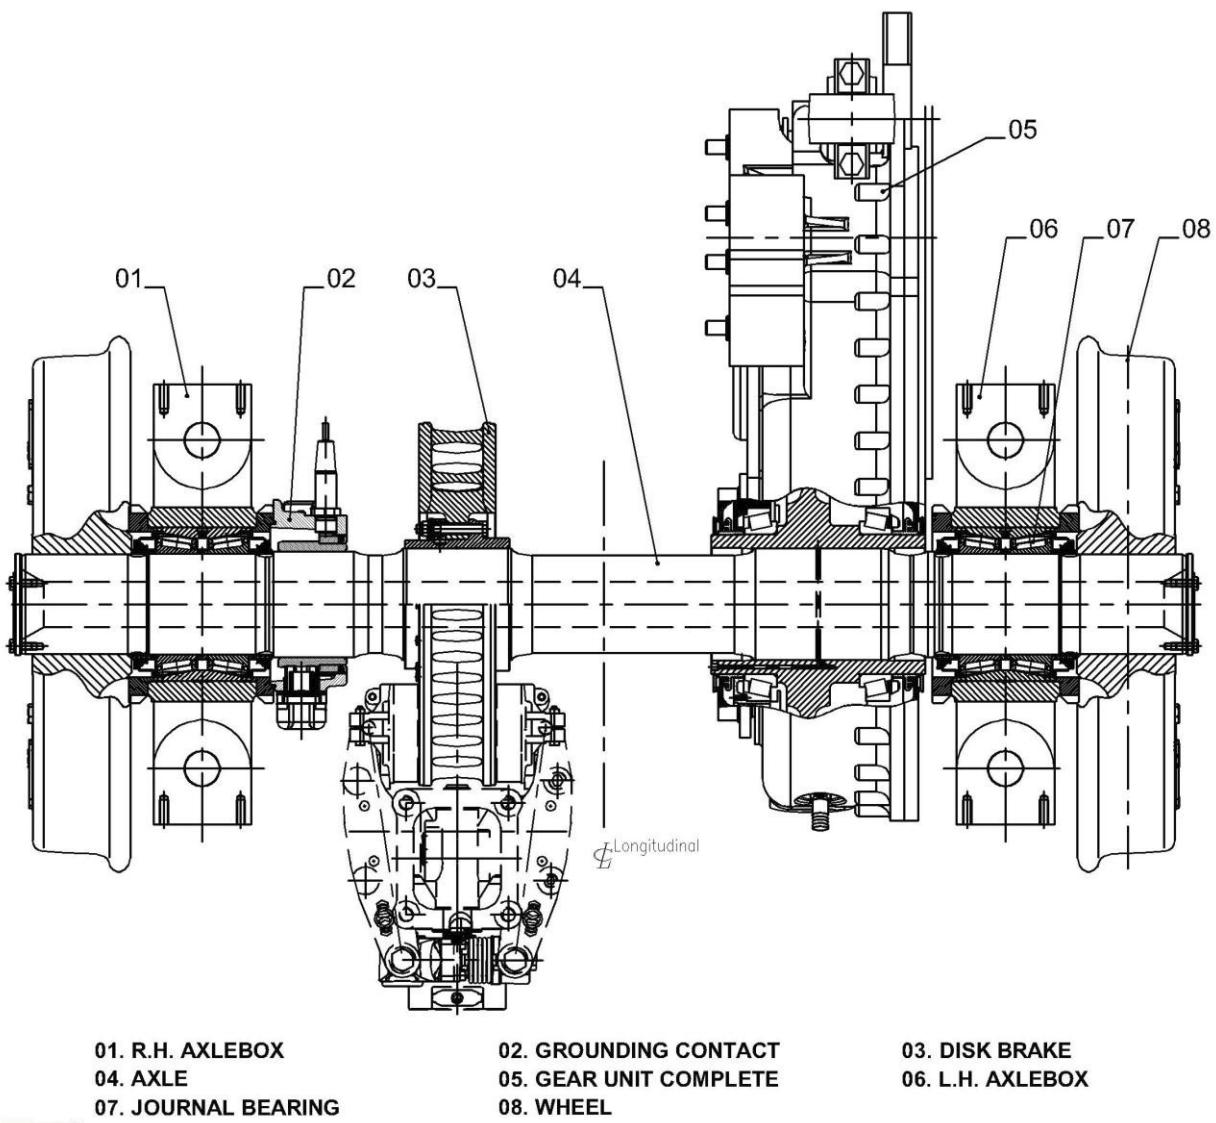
I-02.16 Motor Truck Wheel Set Assembly
